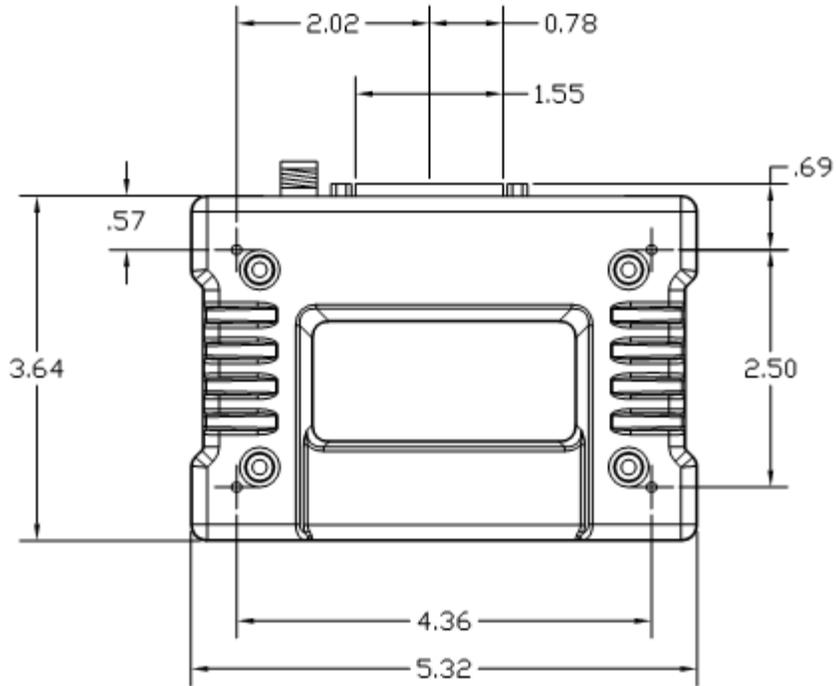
entraNET 220 Packaged Radio Module (Bottom View)
